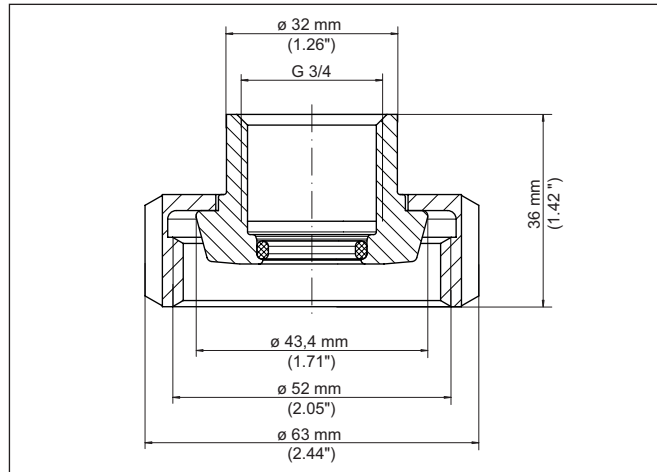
Dimensions of threaded adapter G¾ (DIN 3852-X) on slotted nut DN 25 (DIN 11851) PN 25
